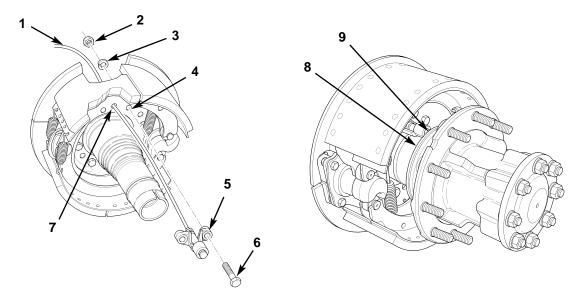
Installing Wheel Sensor and Mounting Bracket on Rear-Rear Axle.
